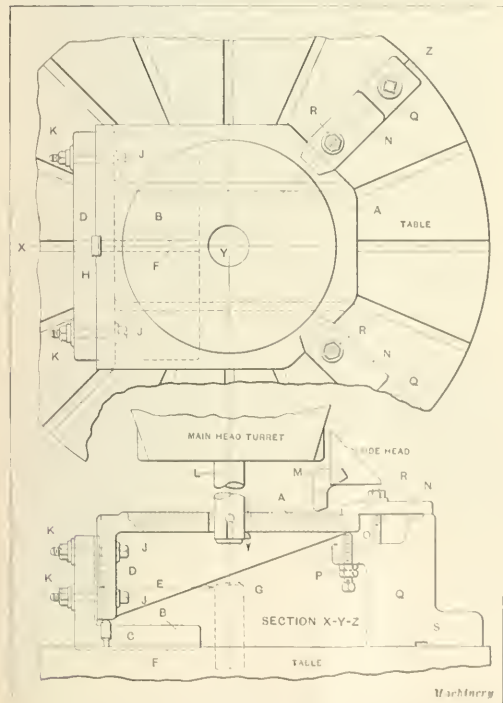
Inexpensive Fixture for holding Two Sizes of Brackets while being bored and faced
